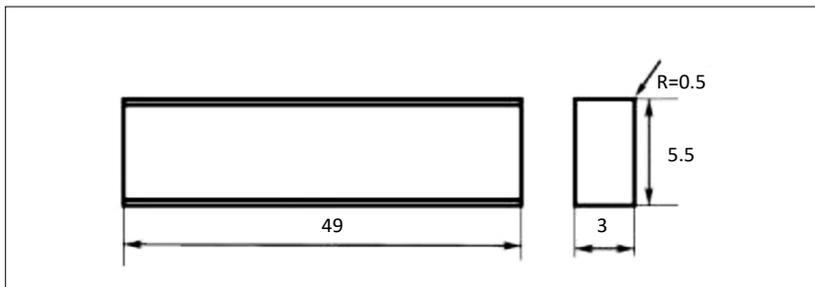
Mould cavity geometry with dimensions for the fatigue MIM specimens [3]
